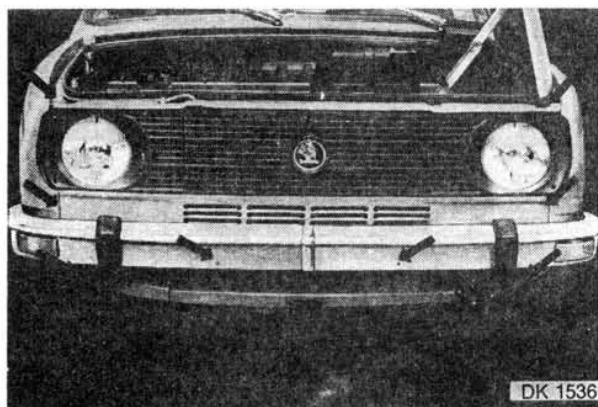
/ - Removing Front-end Panel – fastening points are indicated by arrows
